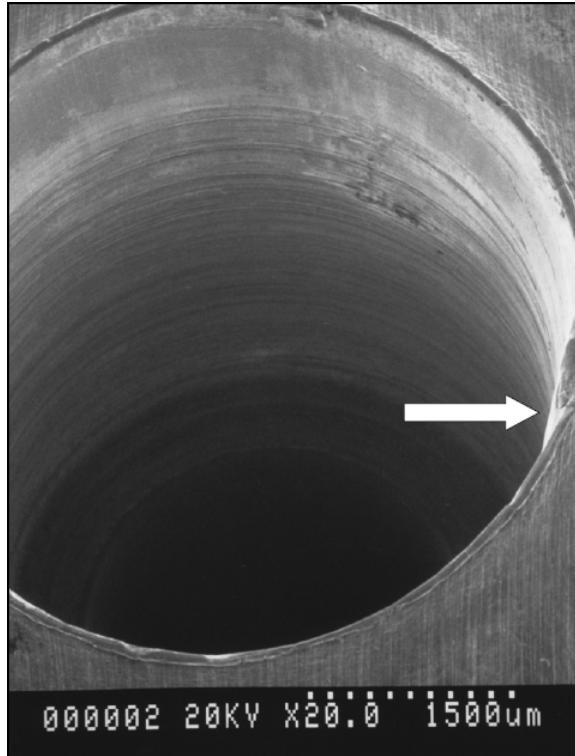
SEM Photograph of Seal Drive Pin Hole Prior to Pinning
